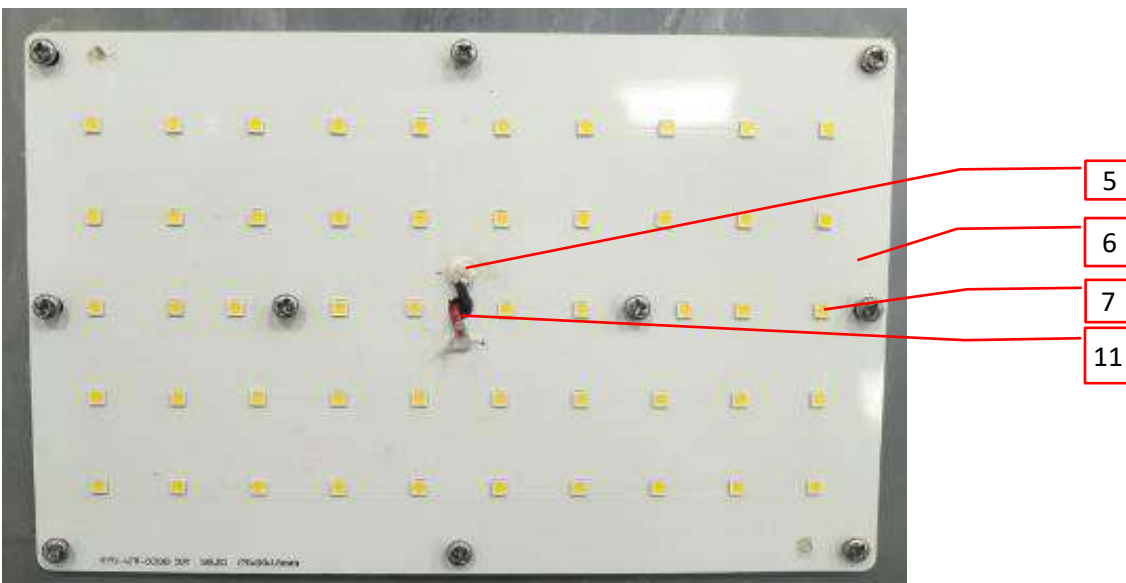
Disassembly view of MLWPC2-100W-XXX-XXK-X
